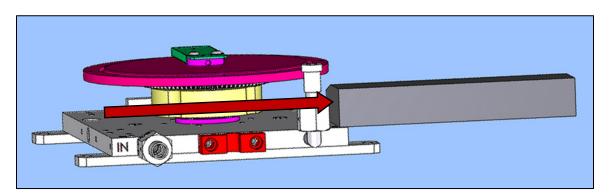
Pushing Magnet Clear of Crucible Mounting Flange
